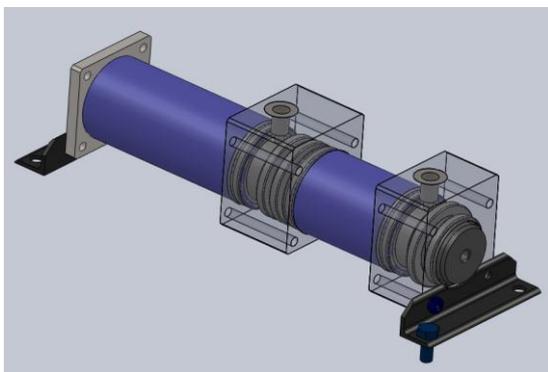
Hydro-Pneumatic Intensifier Assembly (3D)
